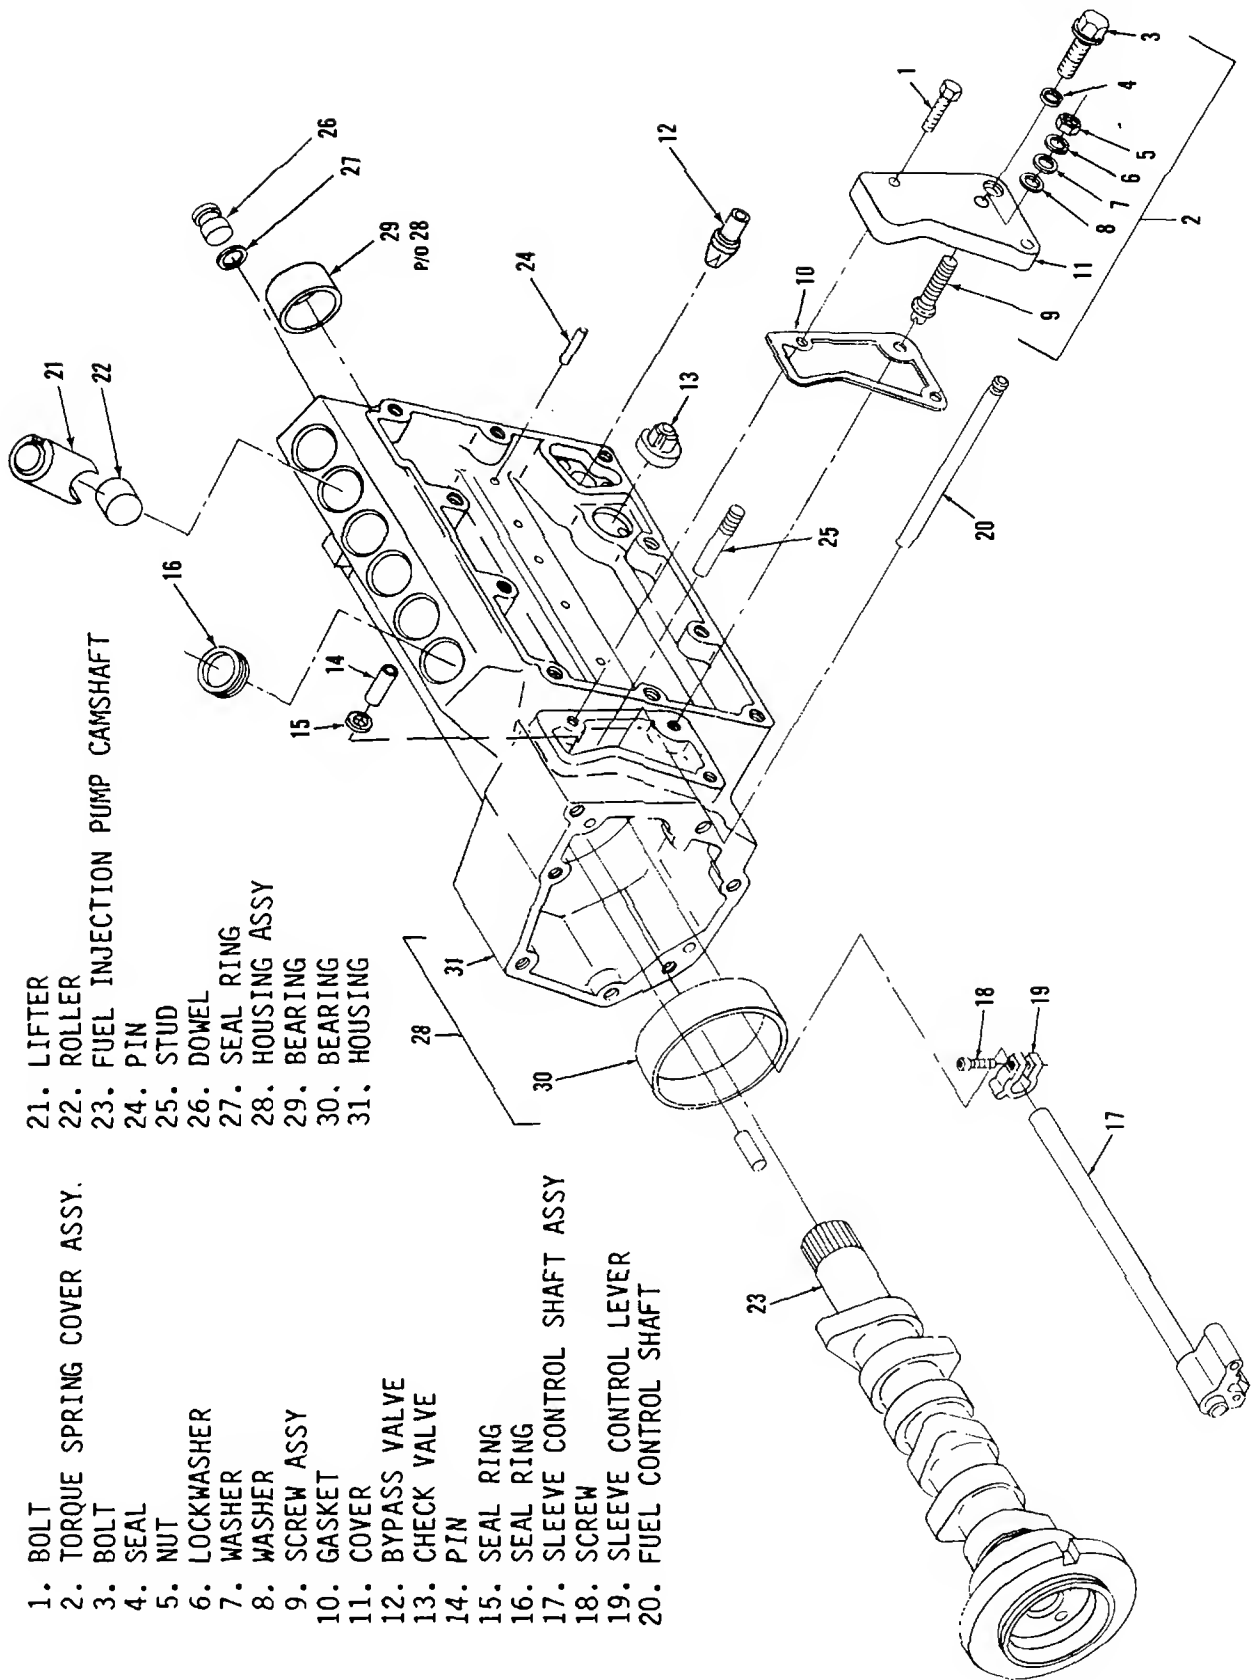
Fuel Injection Pump Housing, Disassembly and Assembly
